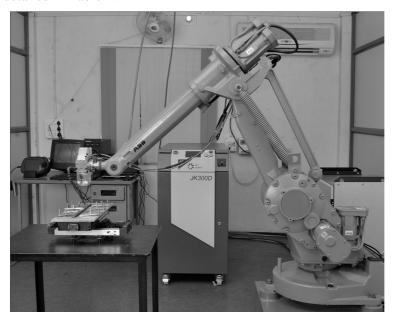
ND-YAG Robotic Laser Beam welding equipment
